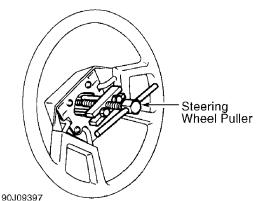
Removing Steering Wheel Courtesy of Nissan Motor Co., U.S.A.
